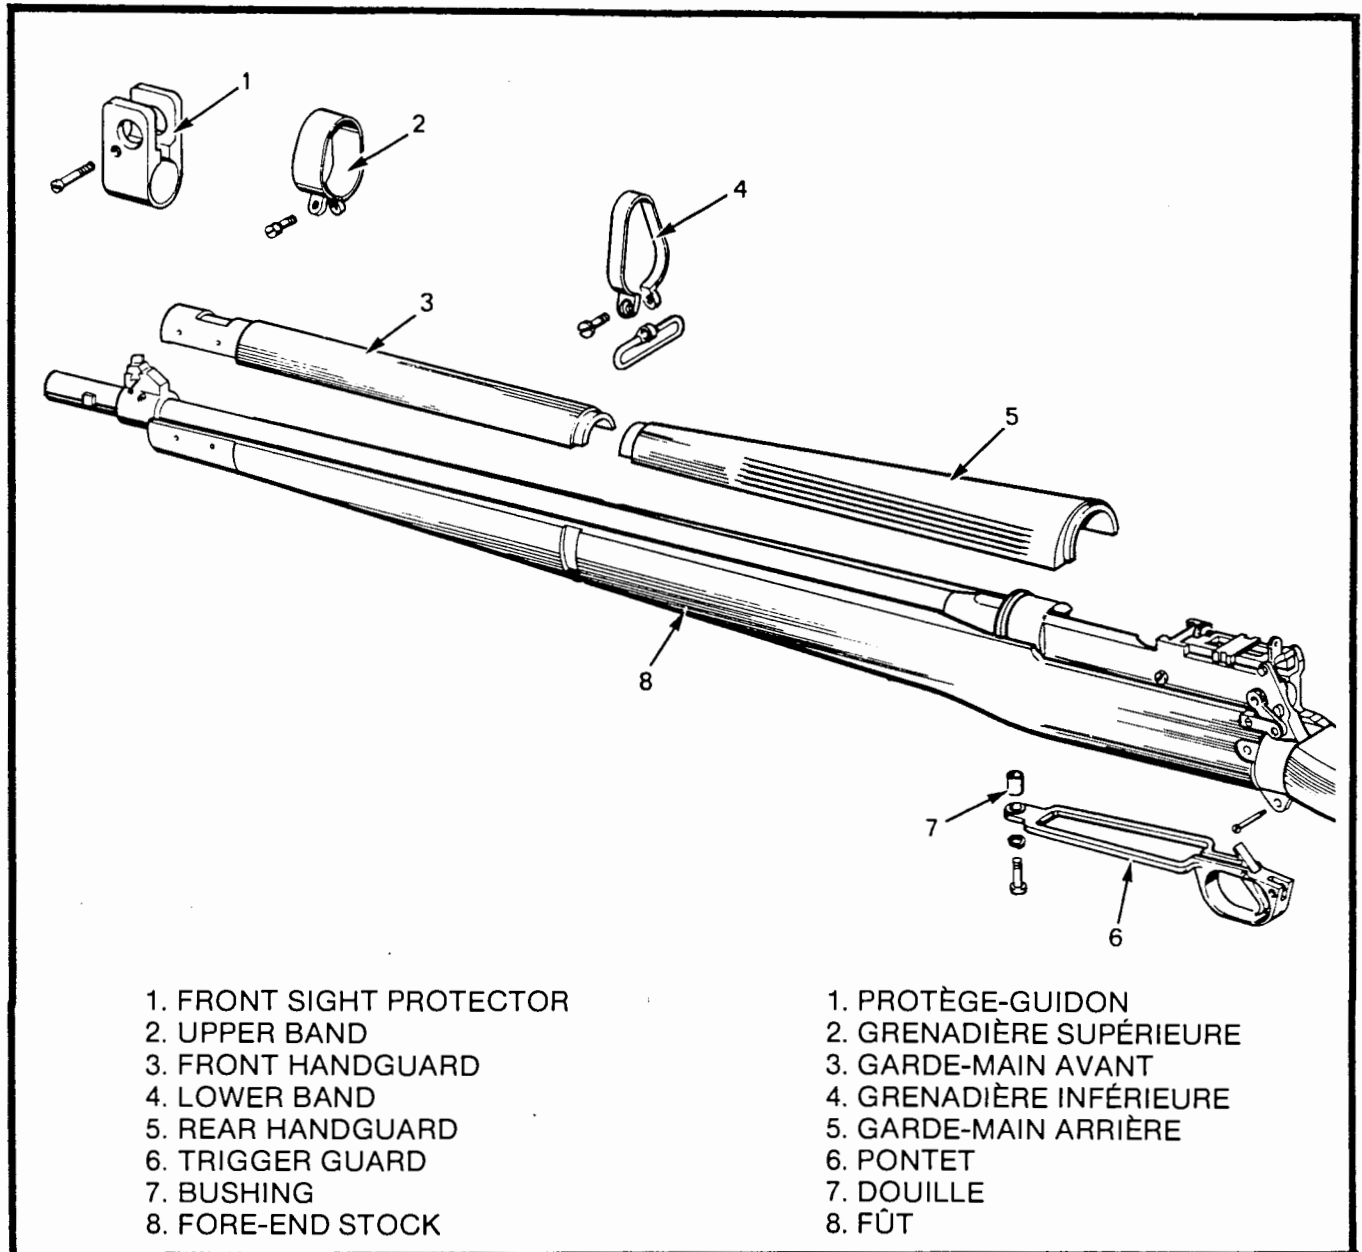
Removing the Handguards and Fore-End Stock
